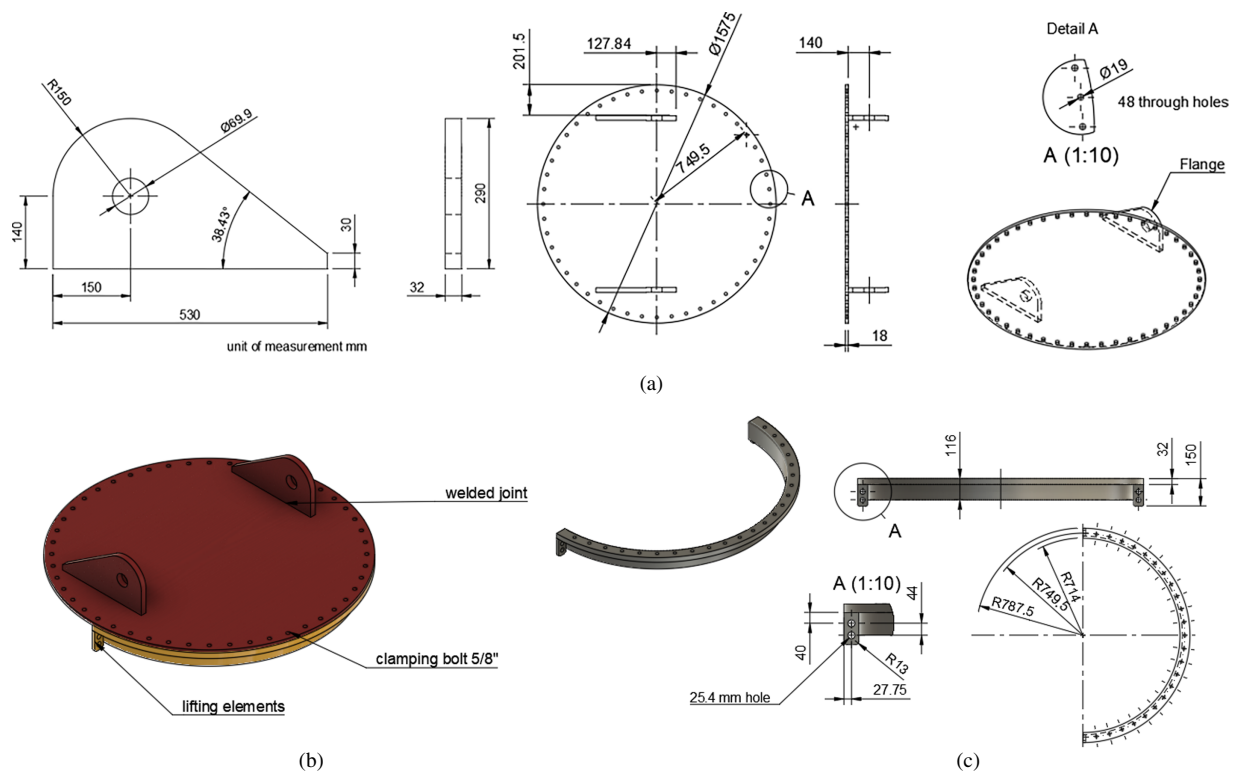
Schematics of the bolt-on steel lifting system: (a) Technical drawings and dimensions of the 32 mm thick ASME A36 blind flange with integrated lifting lugs. (b) 3D isometric view of the complete assembly showing the blind flange, 5/8" clamping bolts, and the lifting elements (stiffeners) positioned on the GFRP flange. (c) Detailed dimensions of the half-moon stiffener used to reinforce the underside of the GFRP flange.
